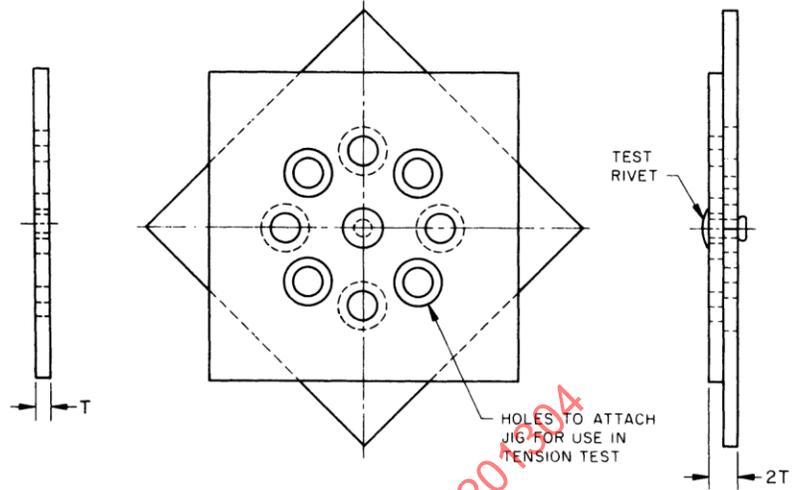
B—ASSEMBLY OF TENSION TEST PLATES BEFORE ATTACHING TO JIG
